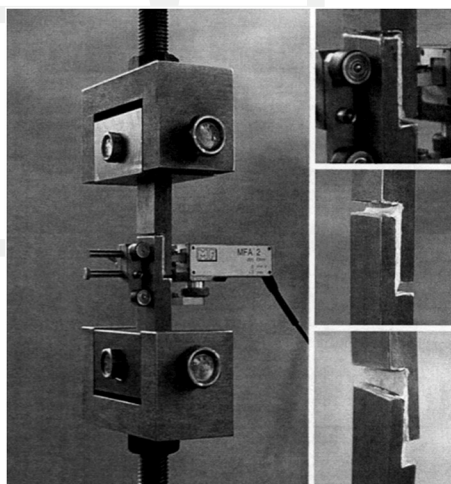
Specimen in shear strength test of an adhesive after failure [46]
